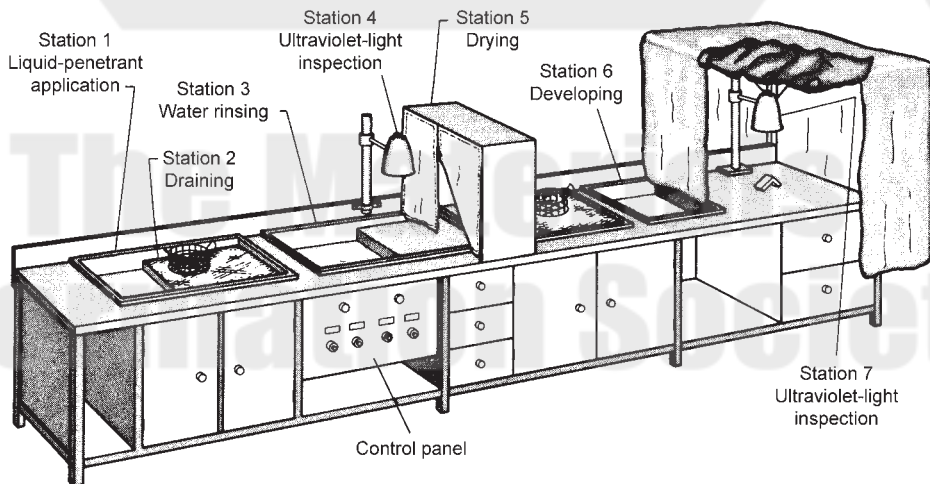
Typical seven station package equipment unit for inspecting workpieces using a water washable, fluorescent penetrant system. Source: Ref 1
